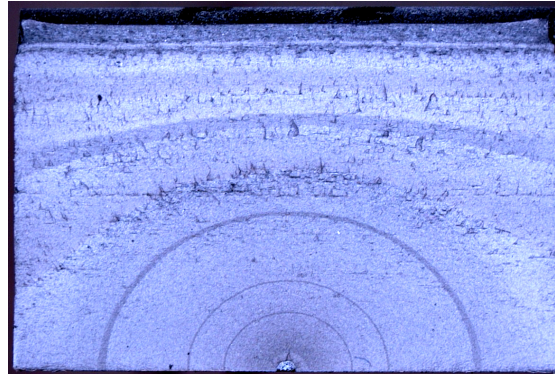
Fractured surface of specimen 2 after cyclic test with crack front marking
